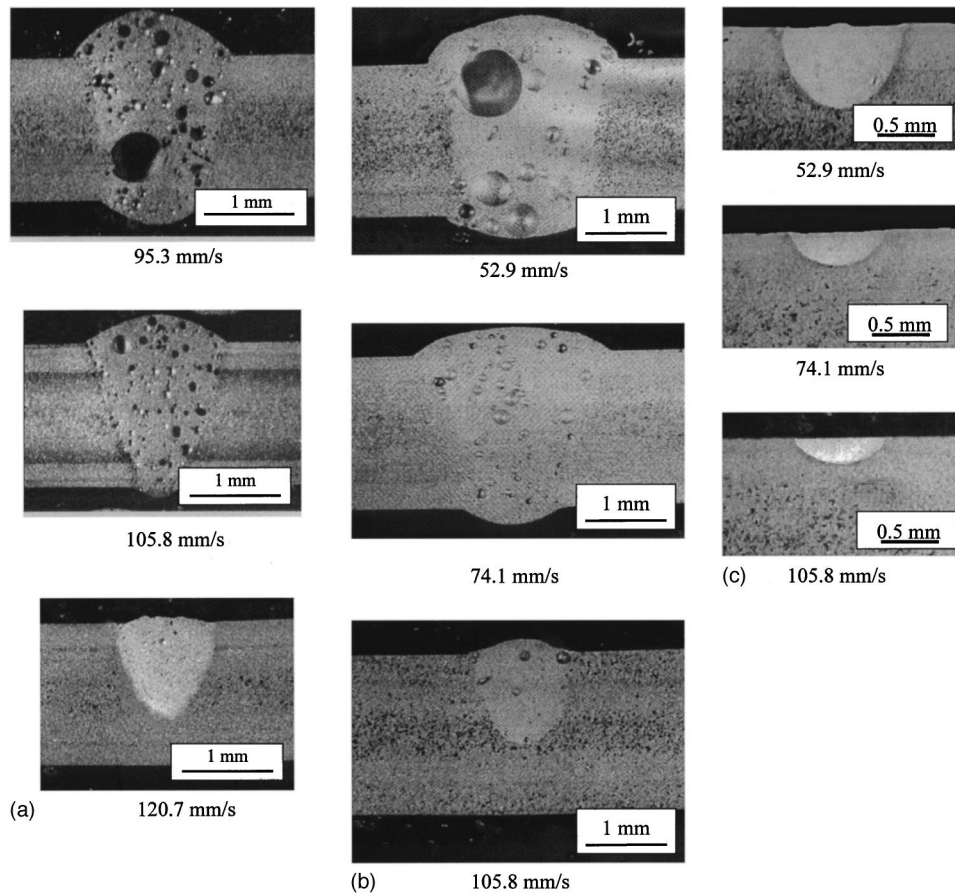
Cross section of laser welds in 2 mm-thick plates of AM60B alloy at different welding speeds and laser powers.
